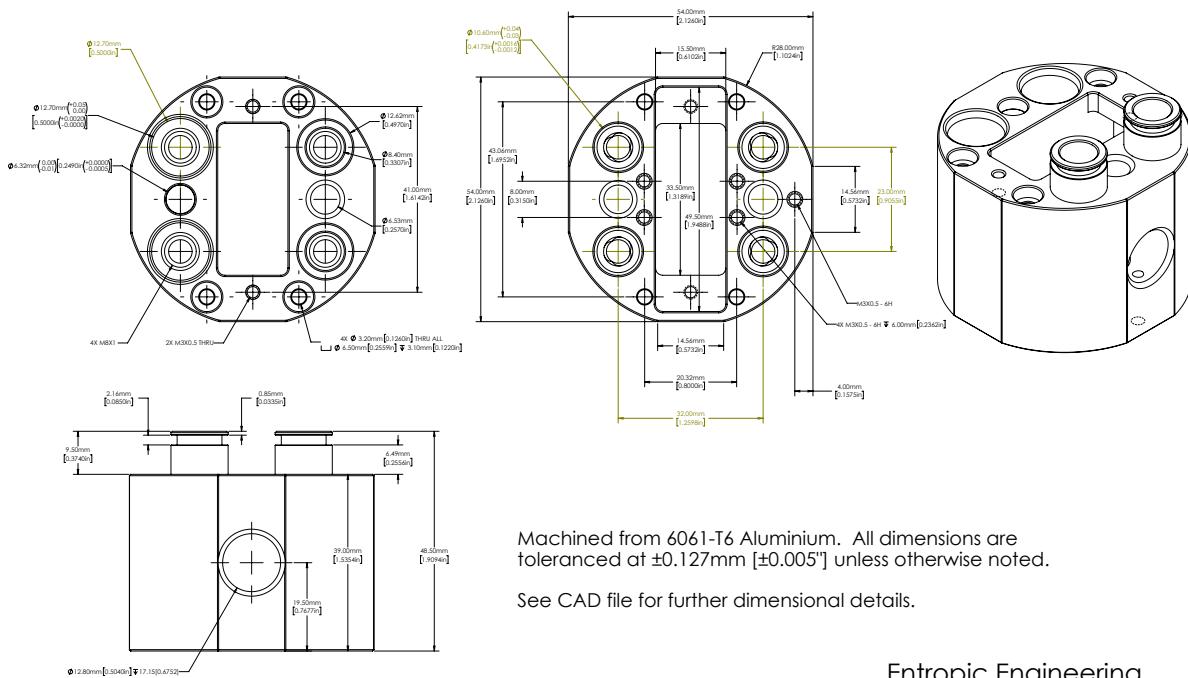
Universal Segment Connector designed by UW CREST and Entropic Engineering.
